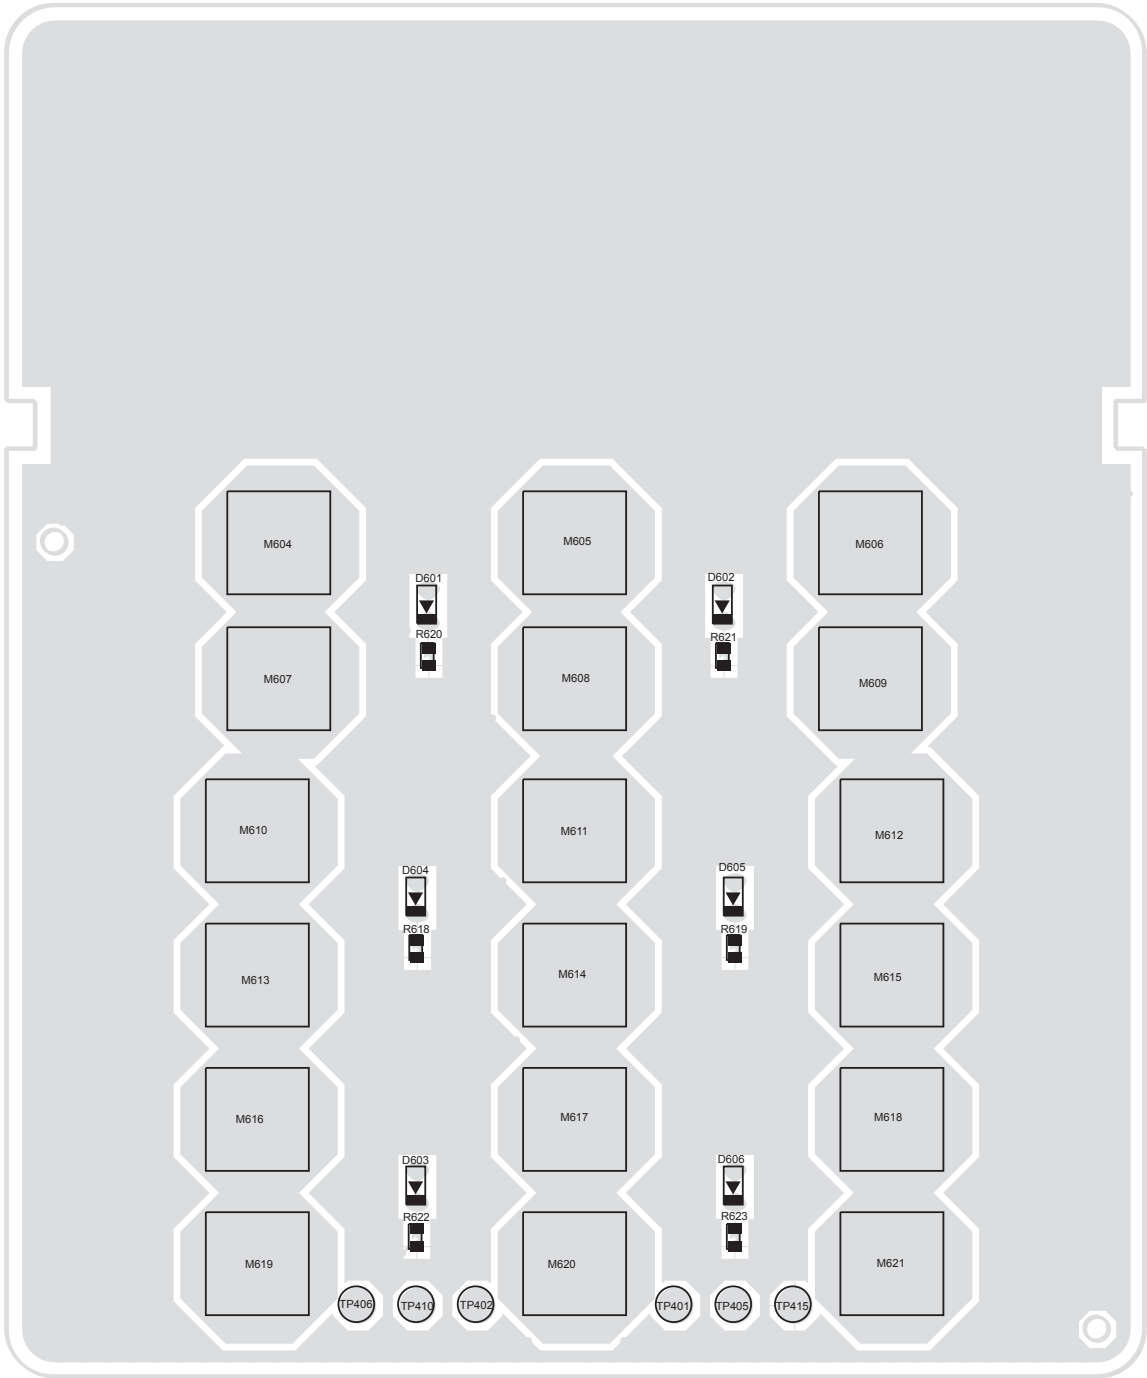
Controller Board Top View for VHF & UHF1 (PCB No. 8404051G01)
